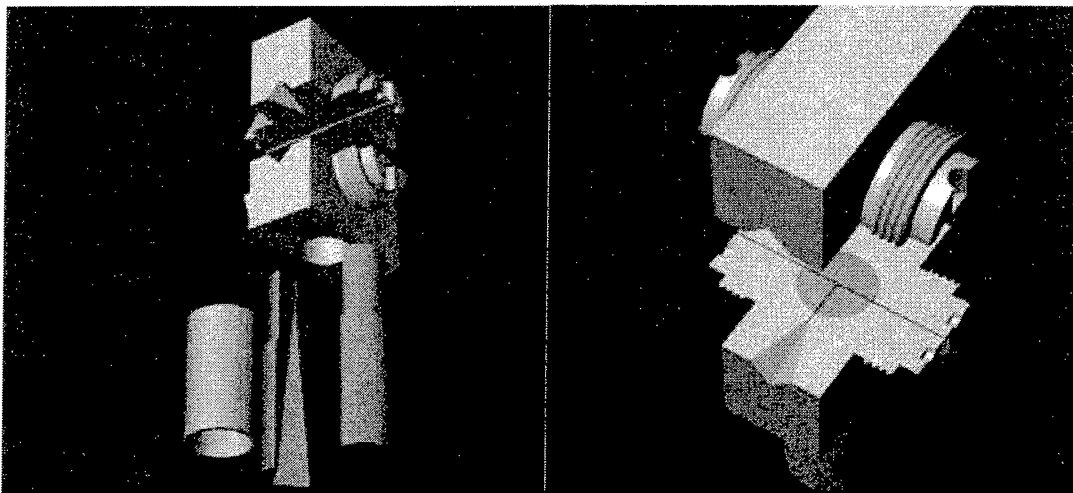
Left: The balanced mixer consists of an inserted horn, magic-T and two end pieces (not shown here). Right: View of the front part of the magic-T with inserted *rf* feed horn and part of the LO feed horn.
